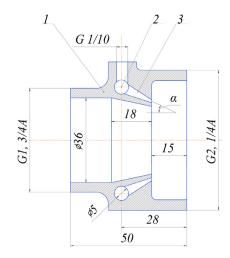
Compressed air supply device: 1 — housing; 2 — annular channel; 3 — nozzle
